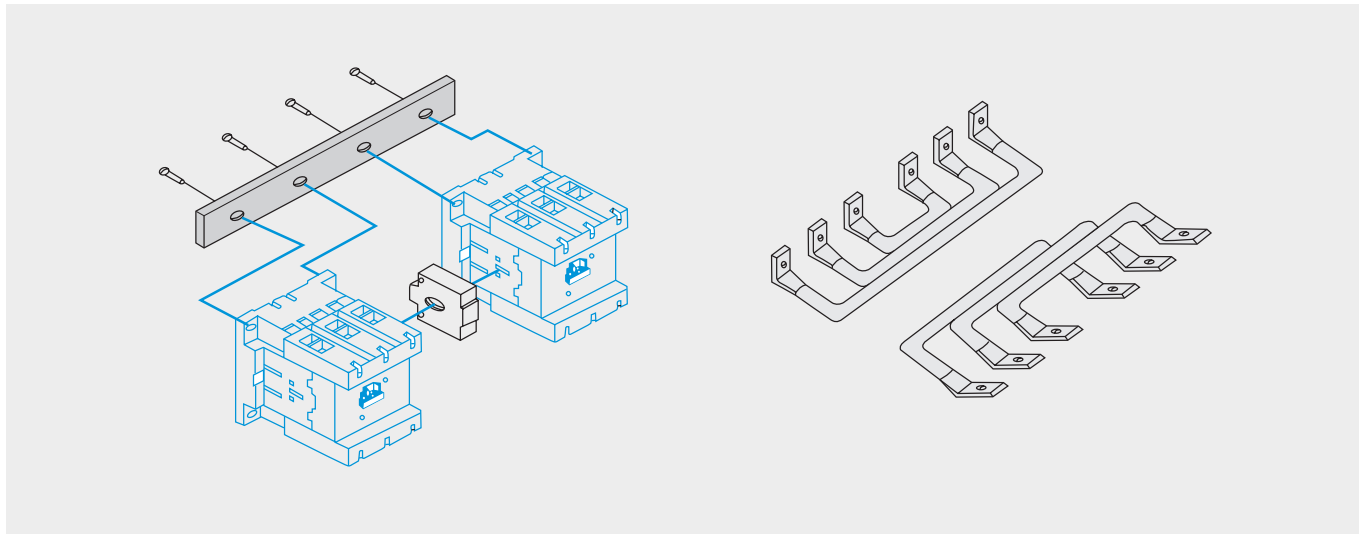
CJX2-205~620, CJX2-F185~F800(Horizontal installation)
